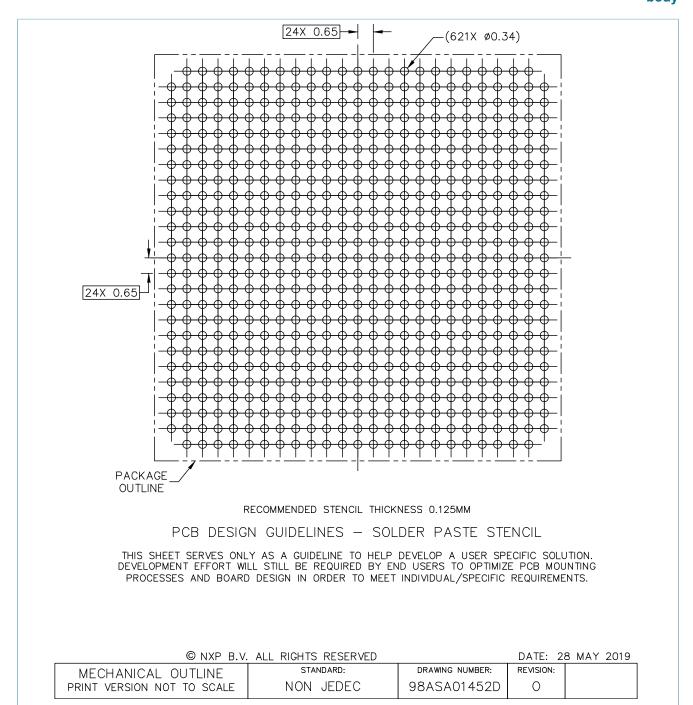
Reflow soldering footprint part3 of FBGA621 (SOT1840-6)
